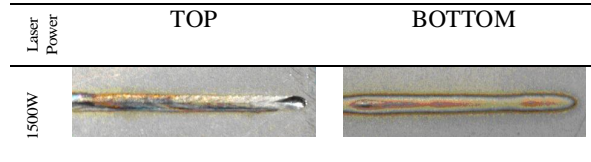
Top and bottom surfaces of weld seam produced by Nd:YAG laser at 60 mm/s and 1500W laser power (image width 20mm)
